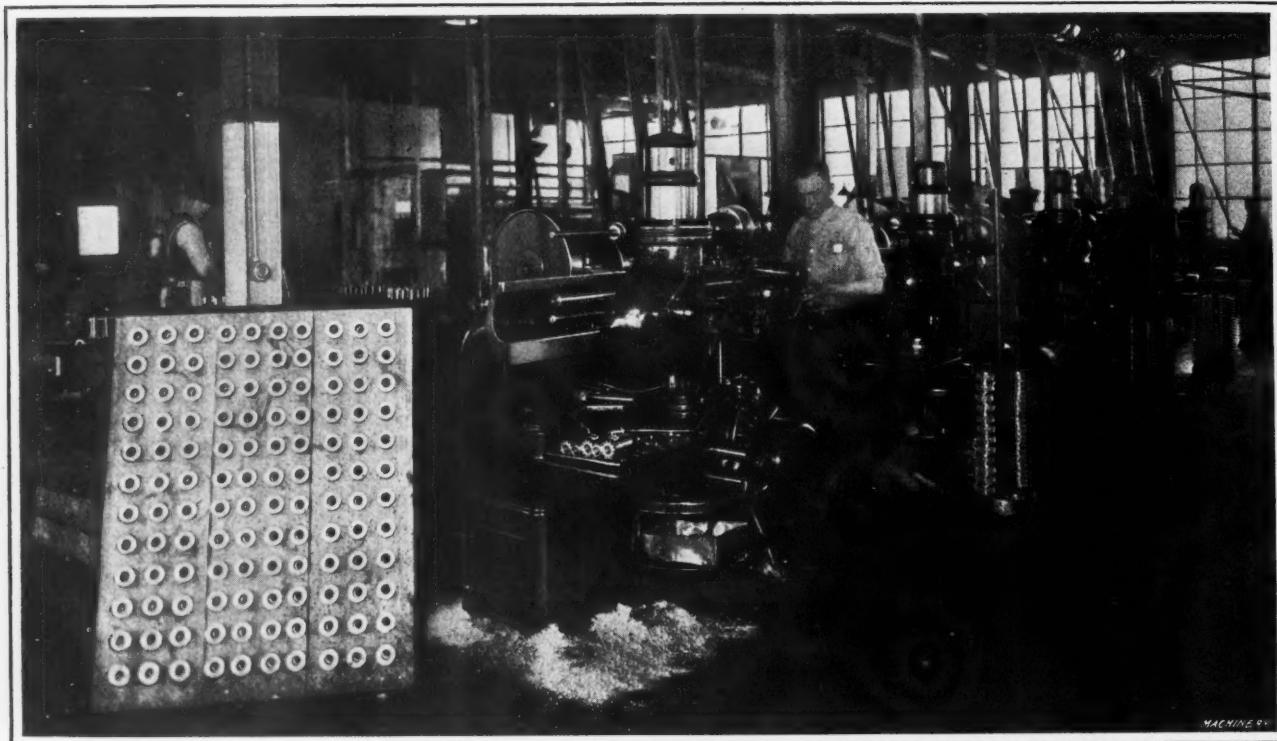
Section of the Gear-cutting Department, showing a Row of Gear Shapers
